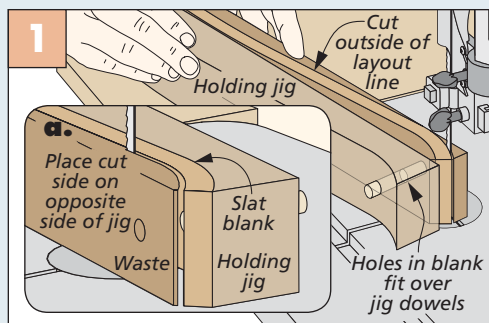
illustrates how a two-sided holding jig secures the slat blank on a pair of dowels. After cutting what will become the top side of the slat, move the blank to the opposite, shaped side of the jig. Cut the bottom profile of the slat before sanding it smooth with a sanding drum using the same jig (Figure 2).
